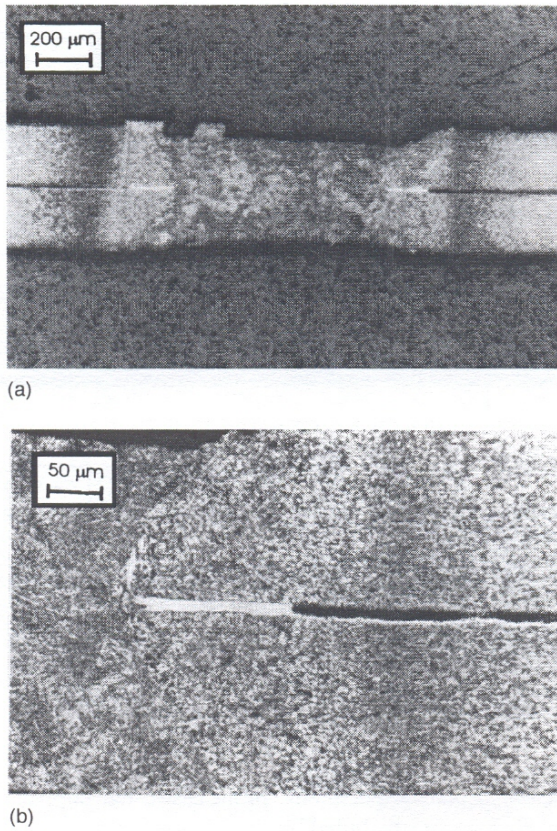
Transverse section of a weld in Au/Ni-plated cold-rolled steel: (a) full weld and (b) brazing at the interface by the plating layers in the HAZ region at the interface.
